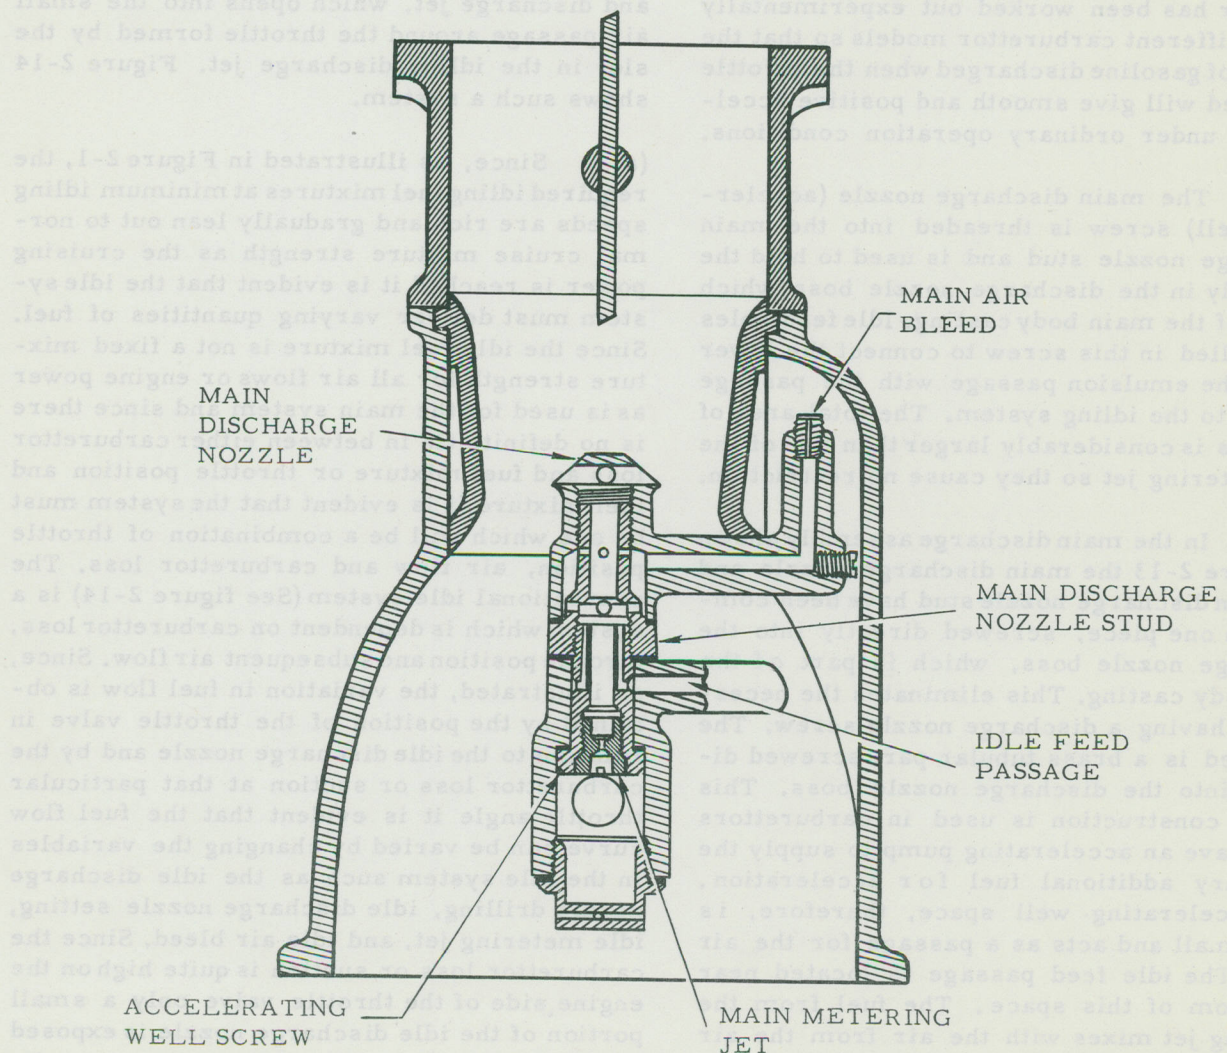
3 PIECE MAIN DISCHARGE ASSEMBLY
